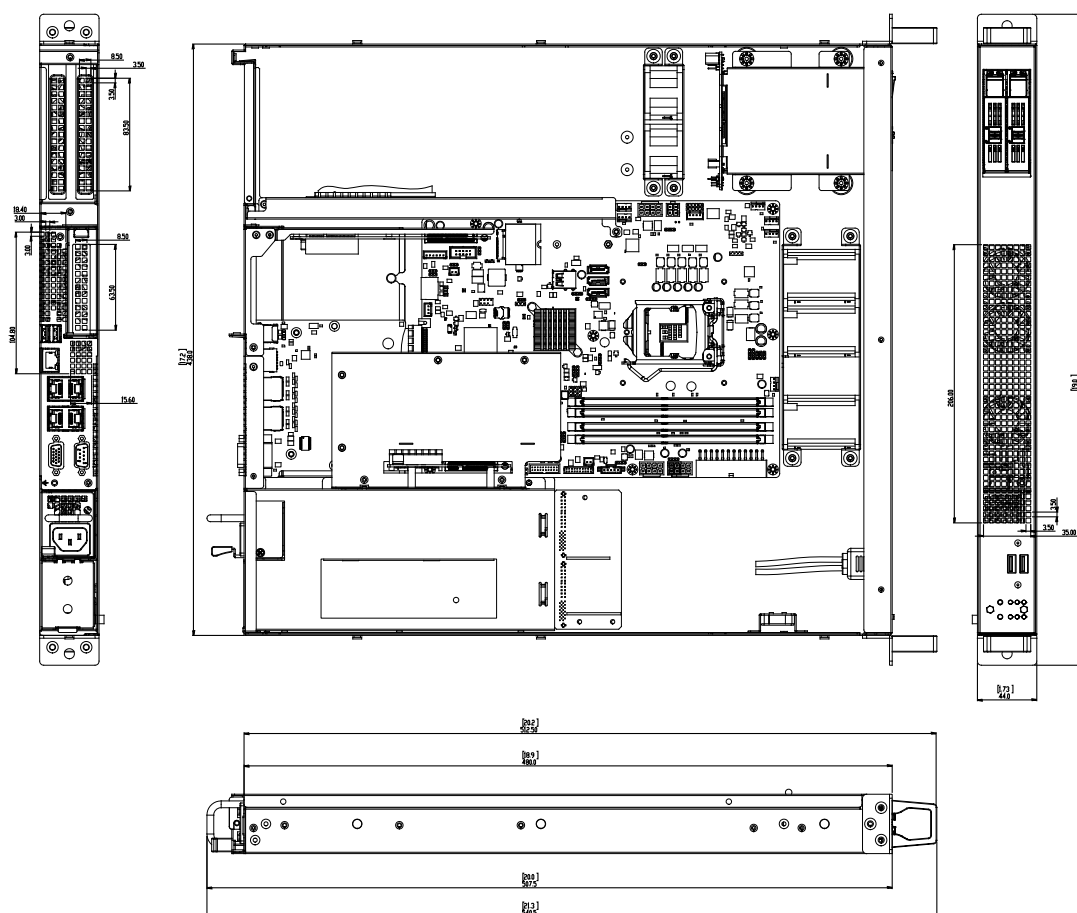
Dimension Diagram/ 产品尺寸 / 產品尺寸
